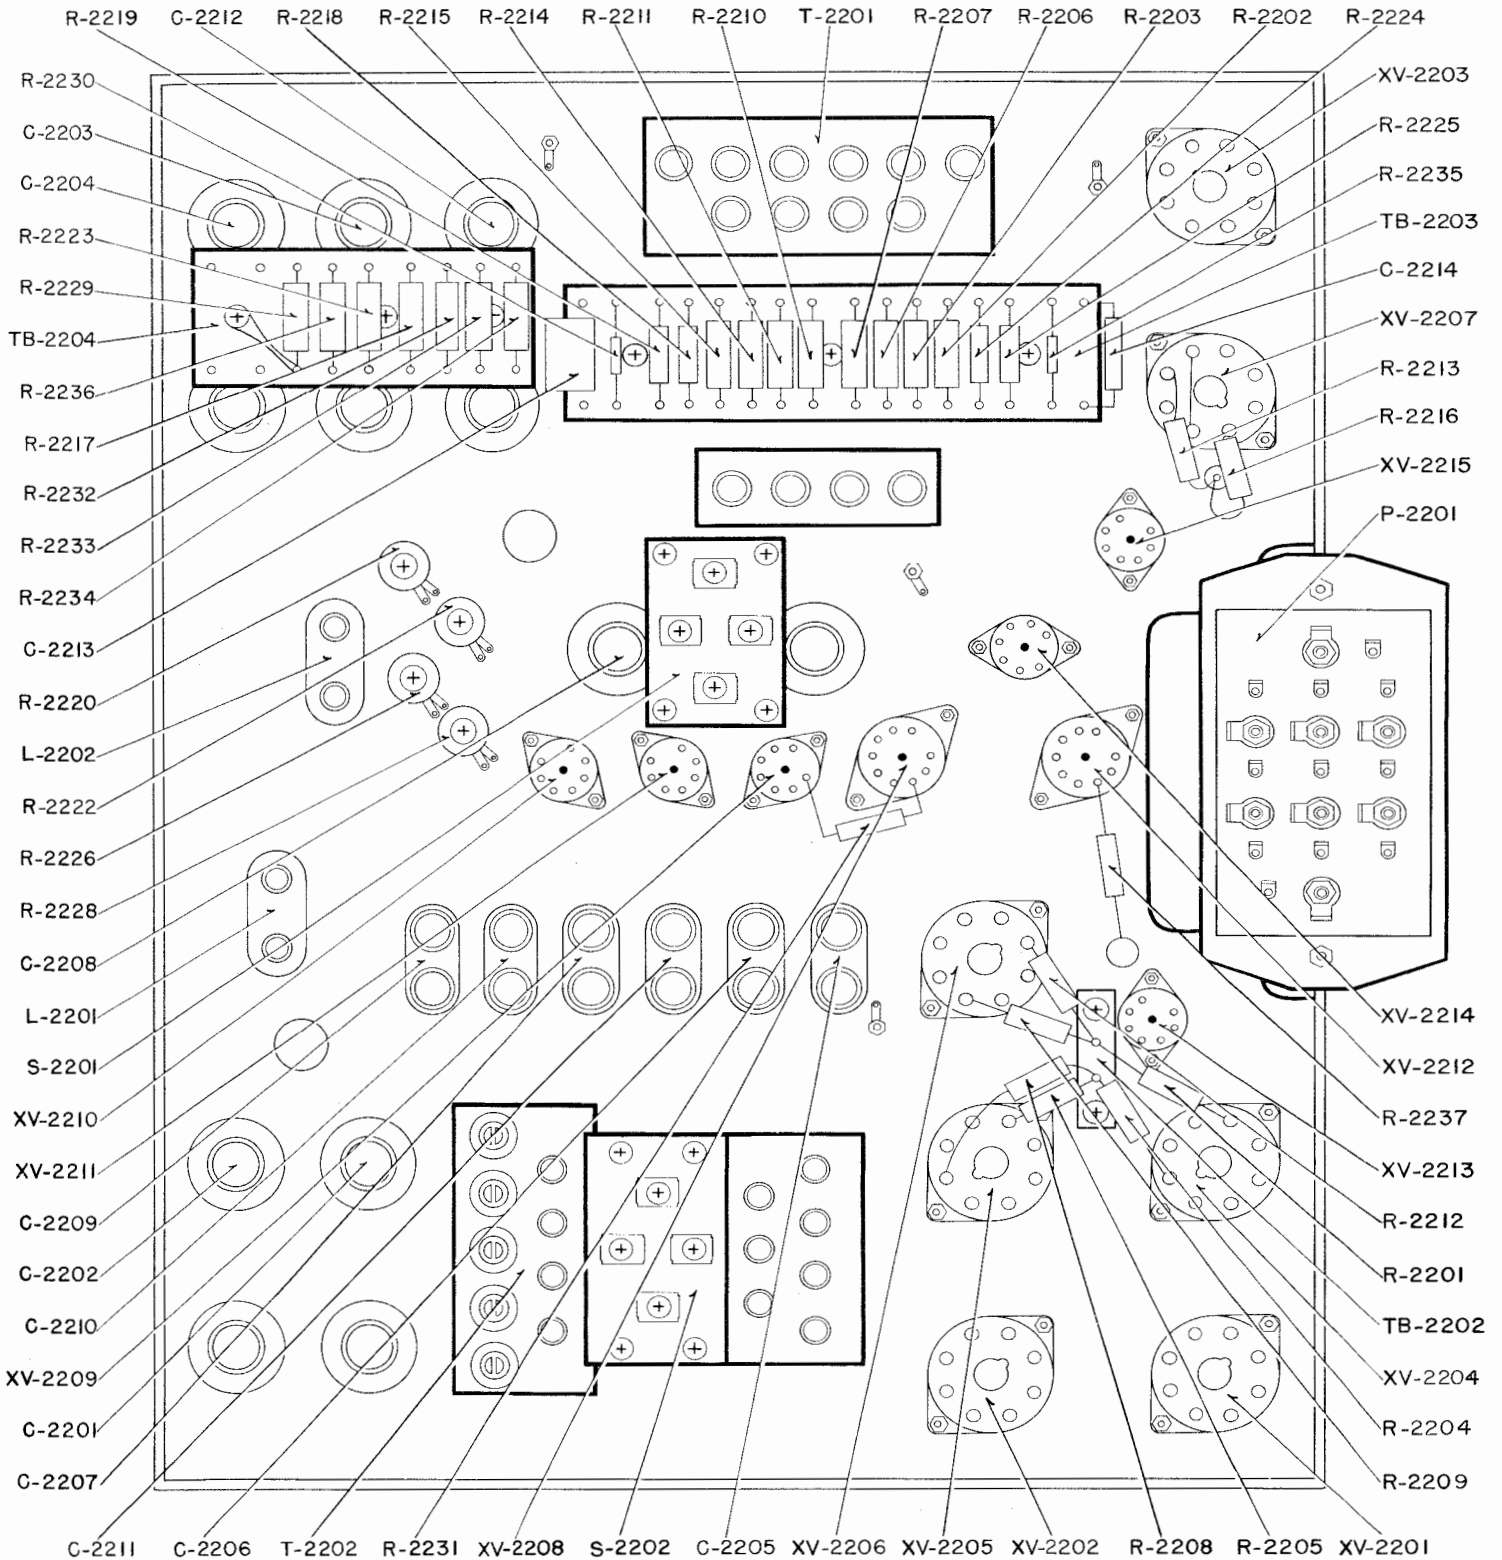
Component Locations Bottom of Chassis, Power Supply PP-648/FRR-24
